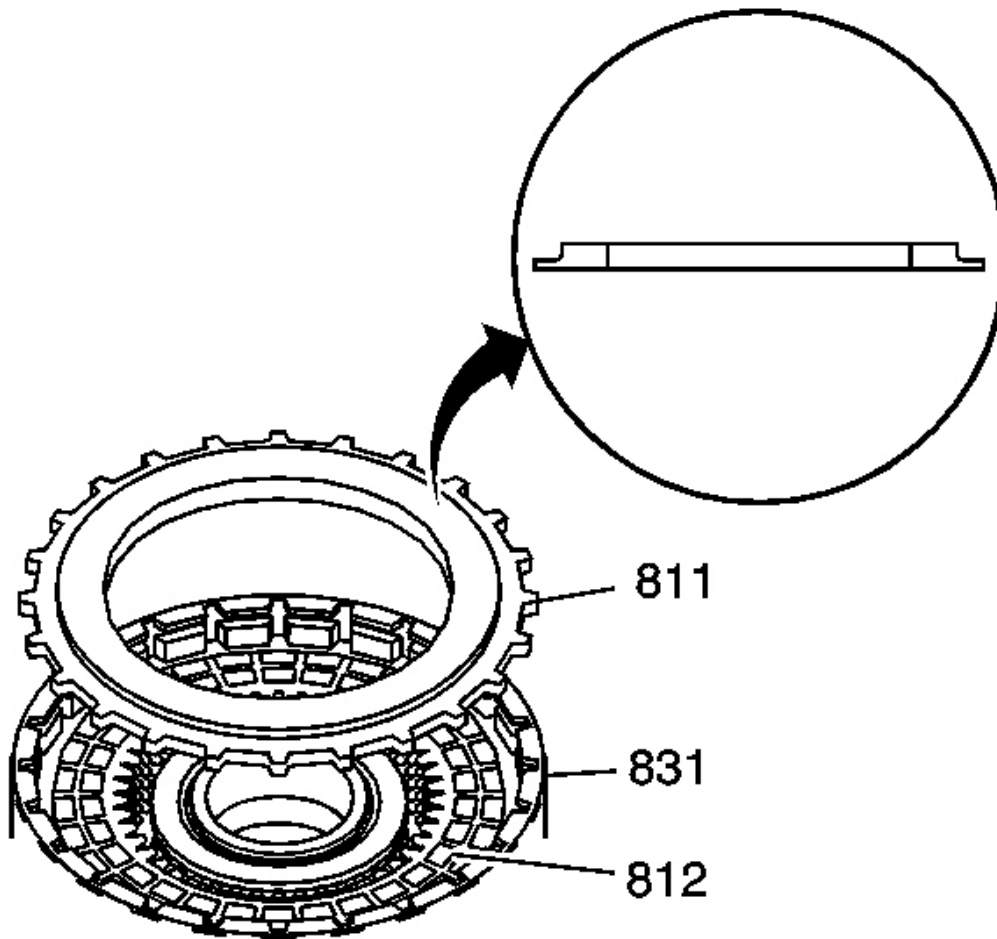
3rd Clutch Selective Backing Plate & 3rd Clutch Fiber Plate
